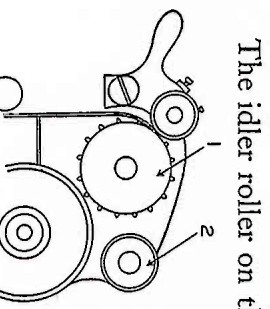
Shows 1 the feed sprocket and the small roller 2.
